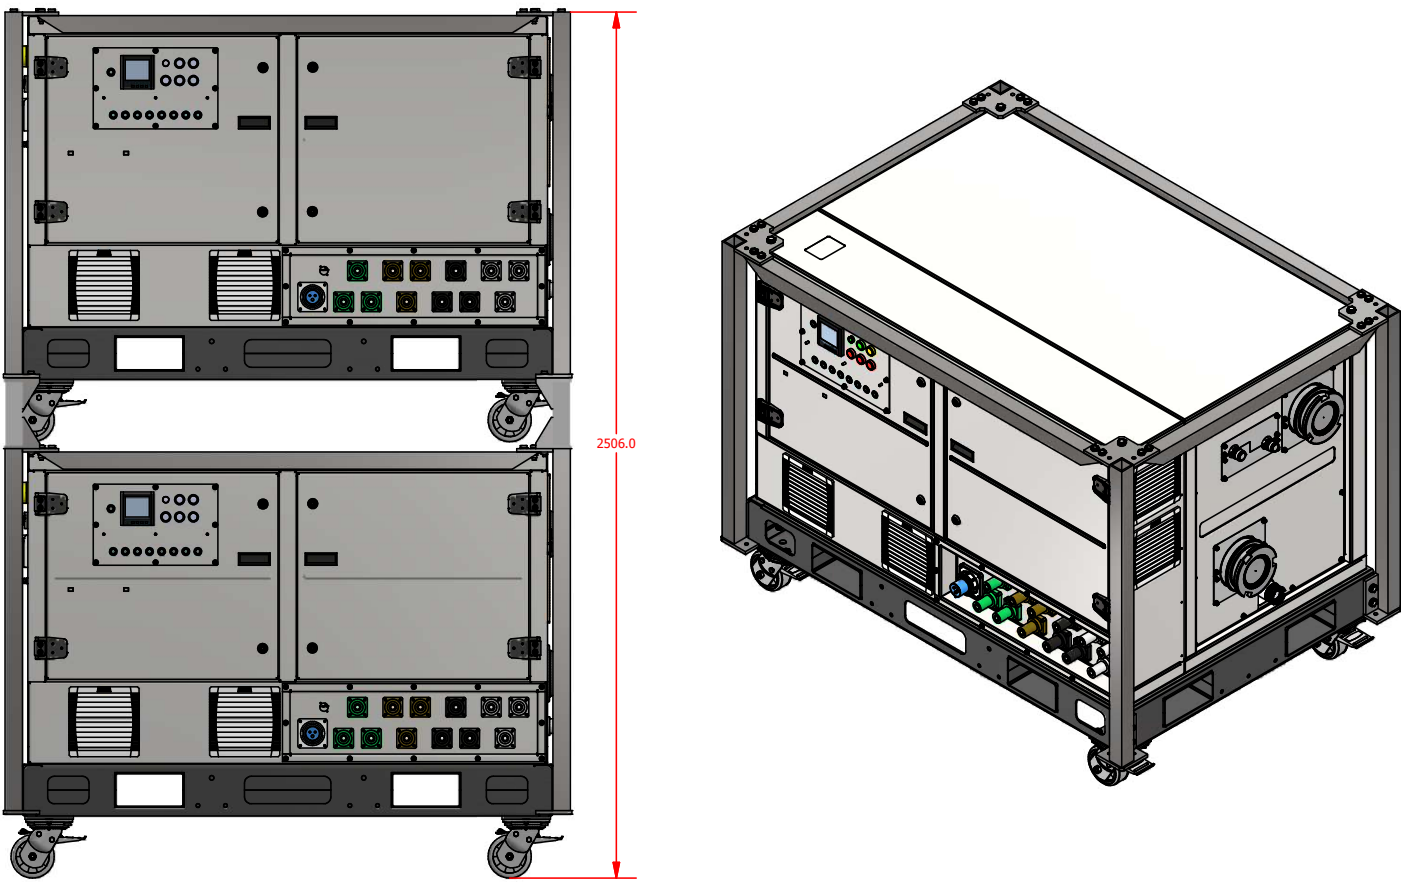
LC35 Load Bank General Arrangement - Stacked and 3D
